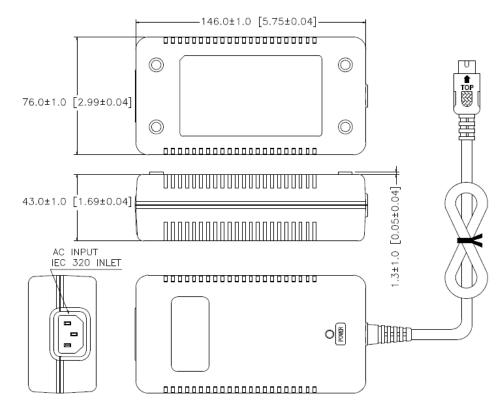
5V/12V AC/DC Power Adapter Dimensions (millimeters [inches])
